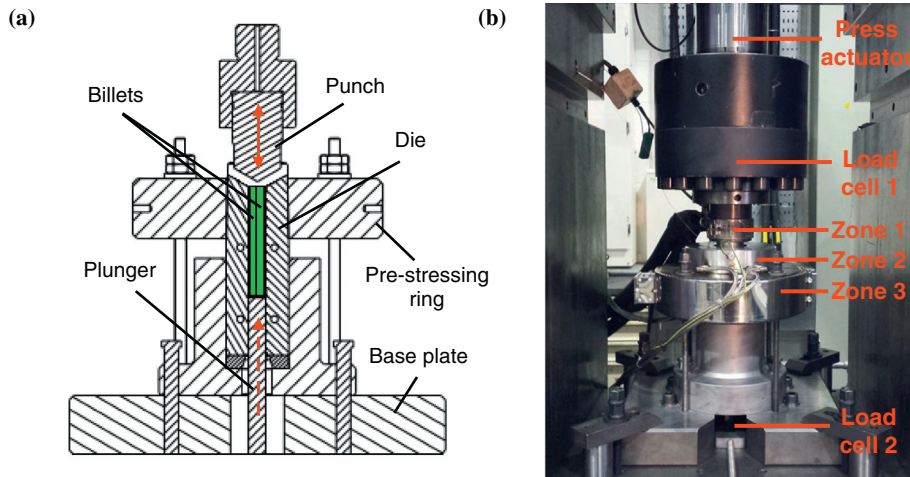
I-ECAP process (a) CAD drawing of the tool design and (b) actual tooling on 1000 KN hydraulic press.
